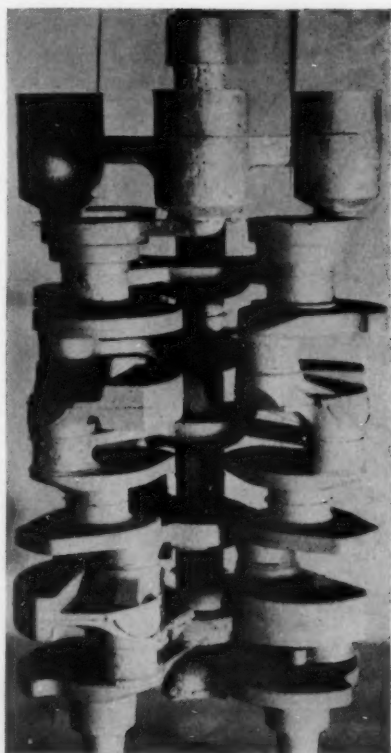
A SPUN CLUSTER CASTING OF CRANKSHAFTS CAST IN GREEN SAND.
